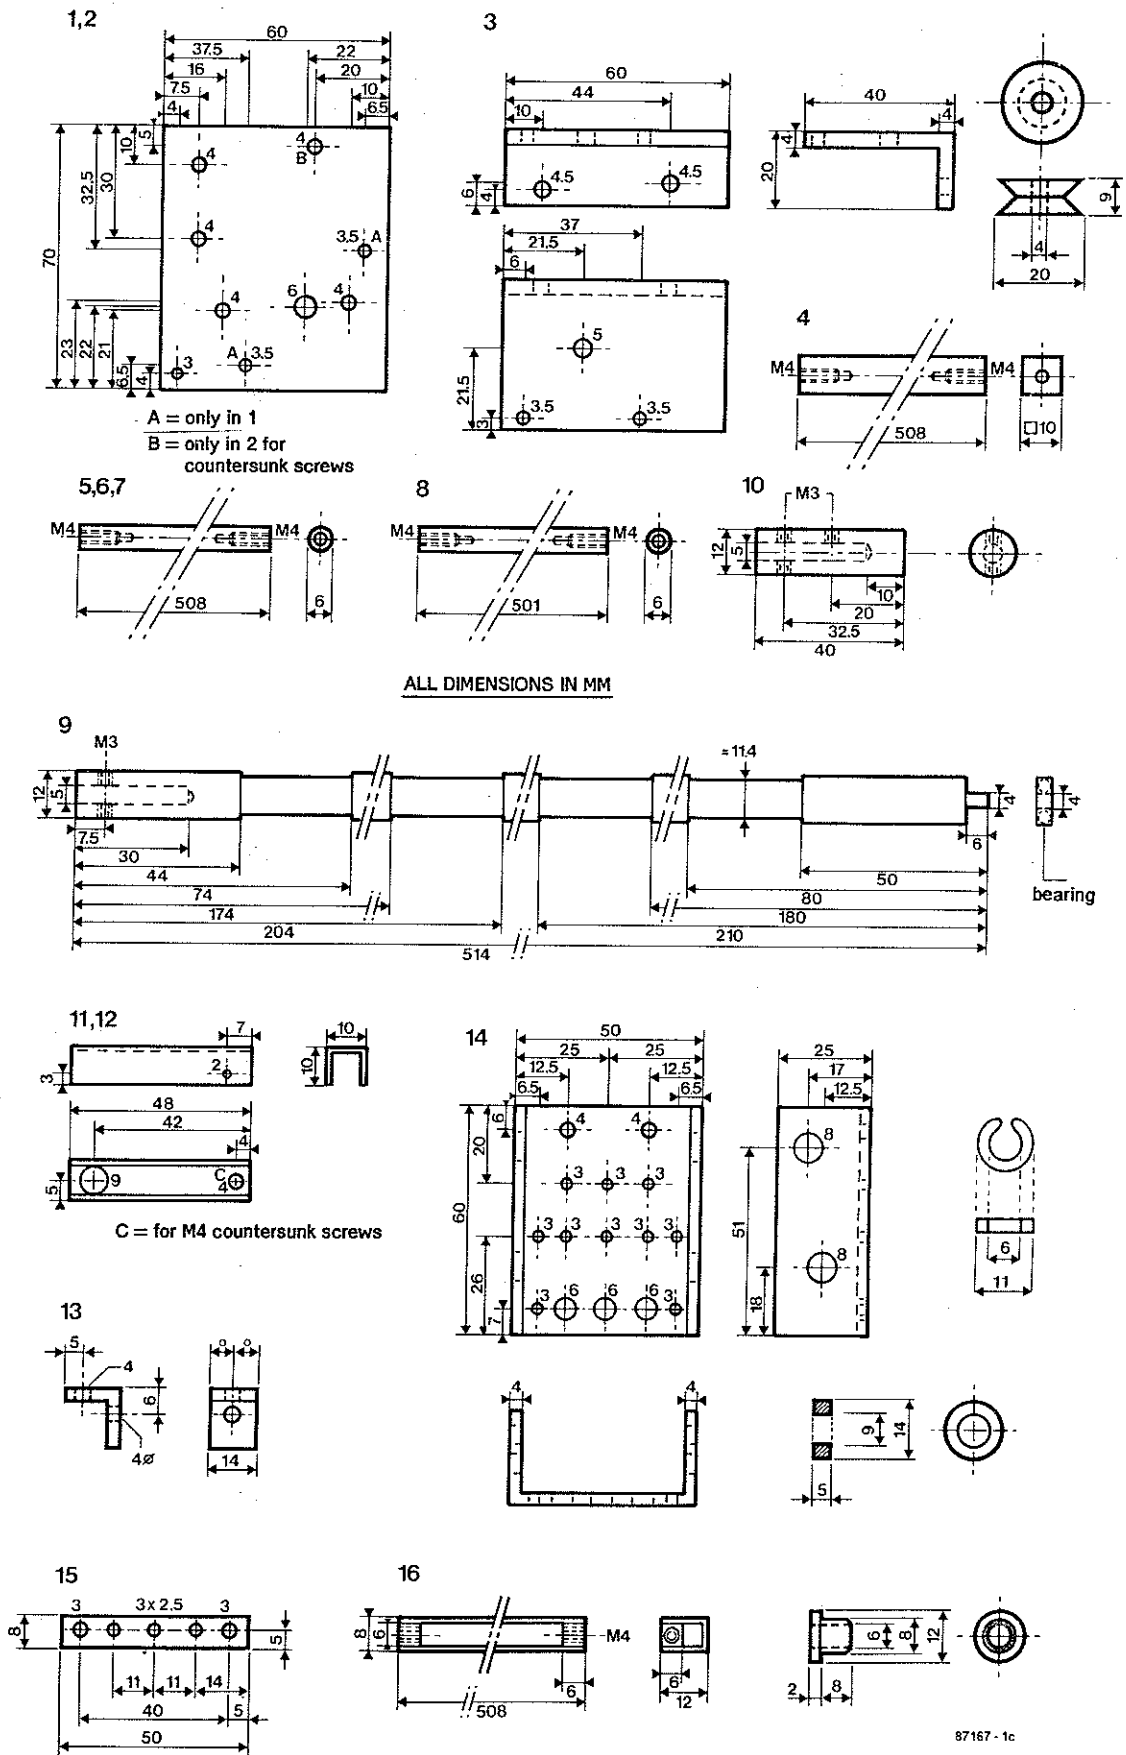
Dimensions of all nylon and aluminium or stainless steel parts that must be cut, filed, turned and drilled.
